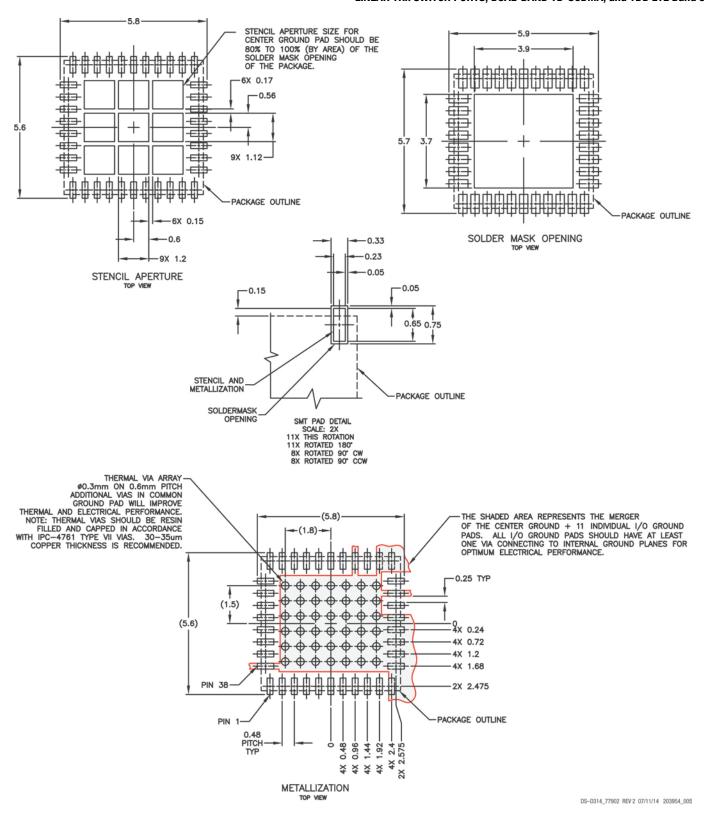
PCB Layout for 5.5 mm x 5.3 mm, 38-Pad Leadless Package – SKY77912-61 Specific
